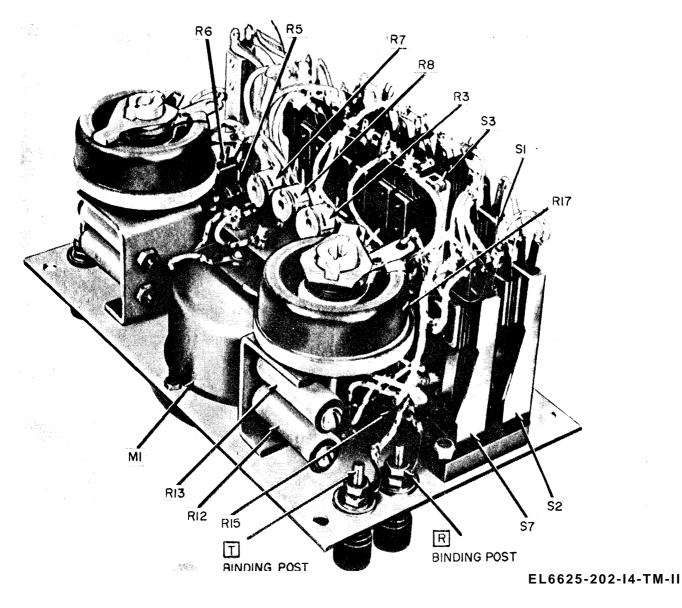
, TS-1775/U, right oblique view of mounting panel removed from case.
